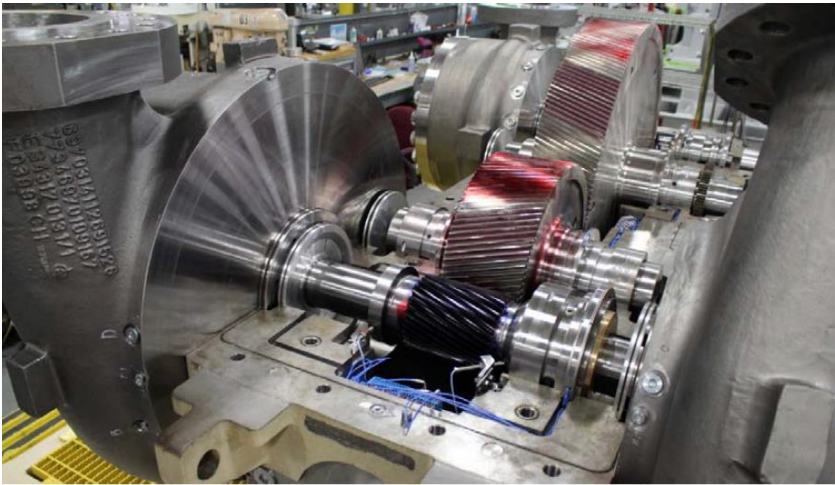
Overhung rotors in an integrally geared compressor during assembly.
